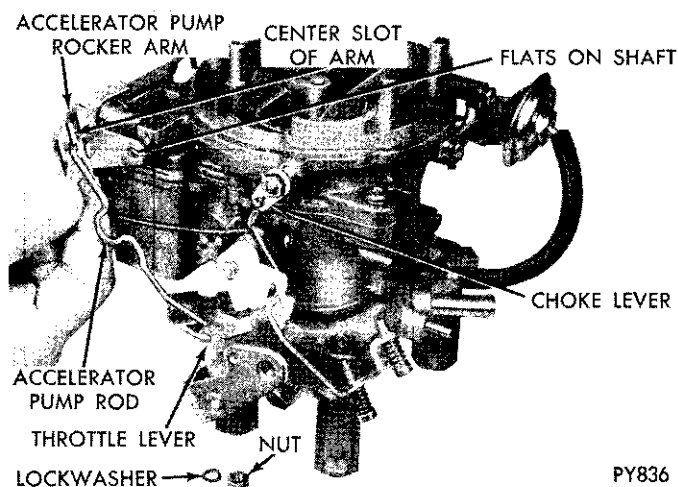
Removing or Installing Accelerator Pump Rocker Arm
